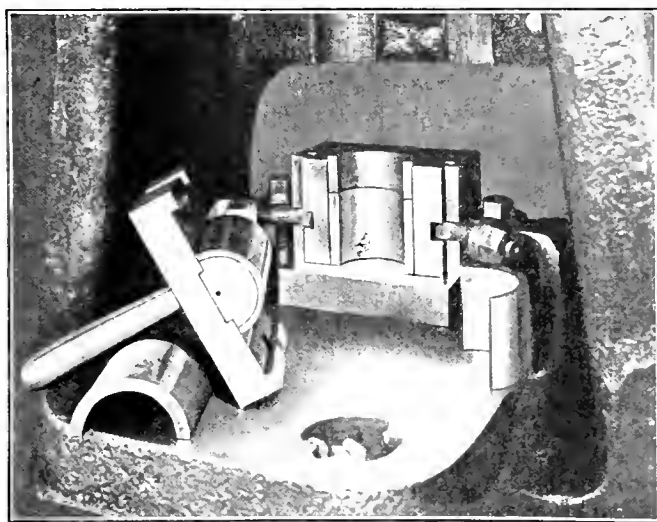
UPSETTING OF BEARINGS TO FINISHED DIMENSIONS—OPERATION 13
